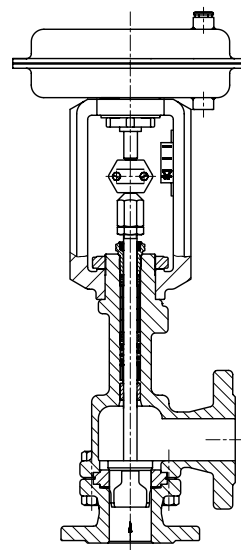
· Type 3258-1 Pneumatic Control Valve
